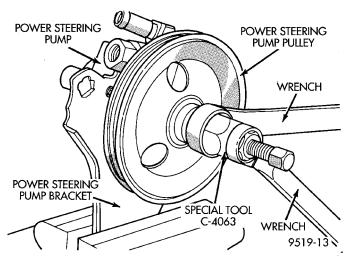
Pulley Installation On Power Steering Pump Shaft
